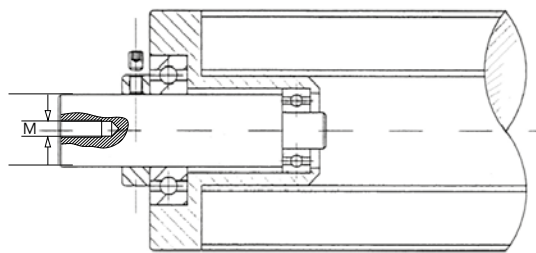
Solution with double inner bearings (also available on smaller version)
